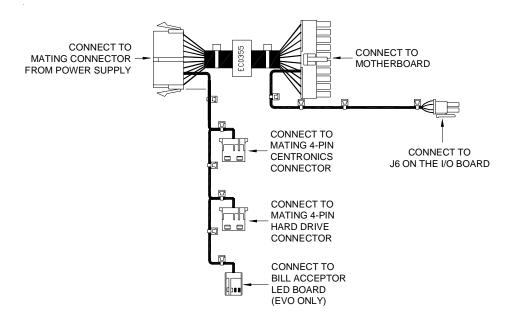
DC JUMPER CABLE (EC0355-01) WITH CONNECTIONS
